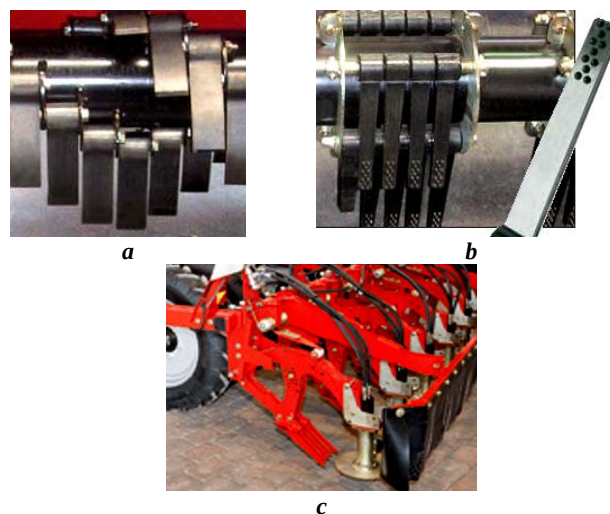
The working tools of the top harvesting machine BM 330: *a* – a rotary top cutter; *b* – counter-rotating polyurethane beaters on the shafts; *c* – a primary cutter of the active type with tracing
